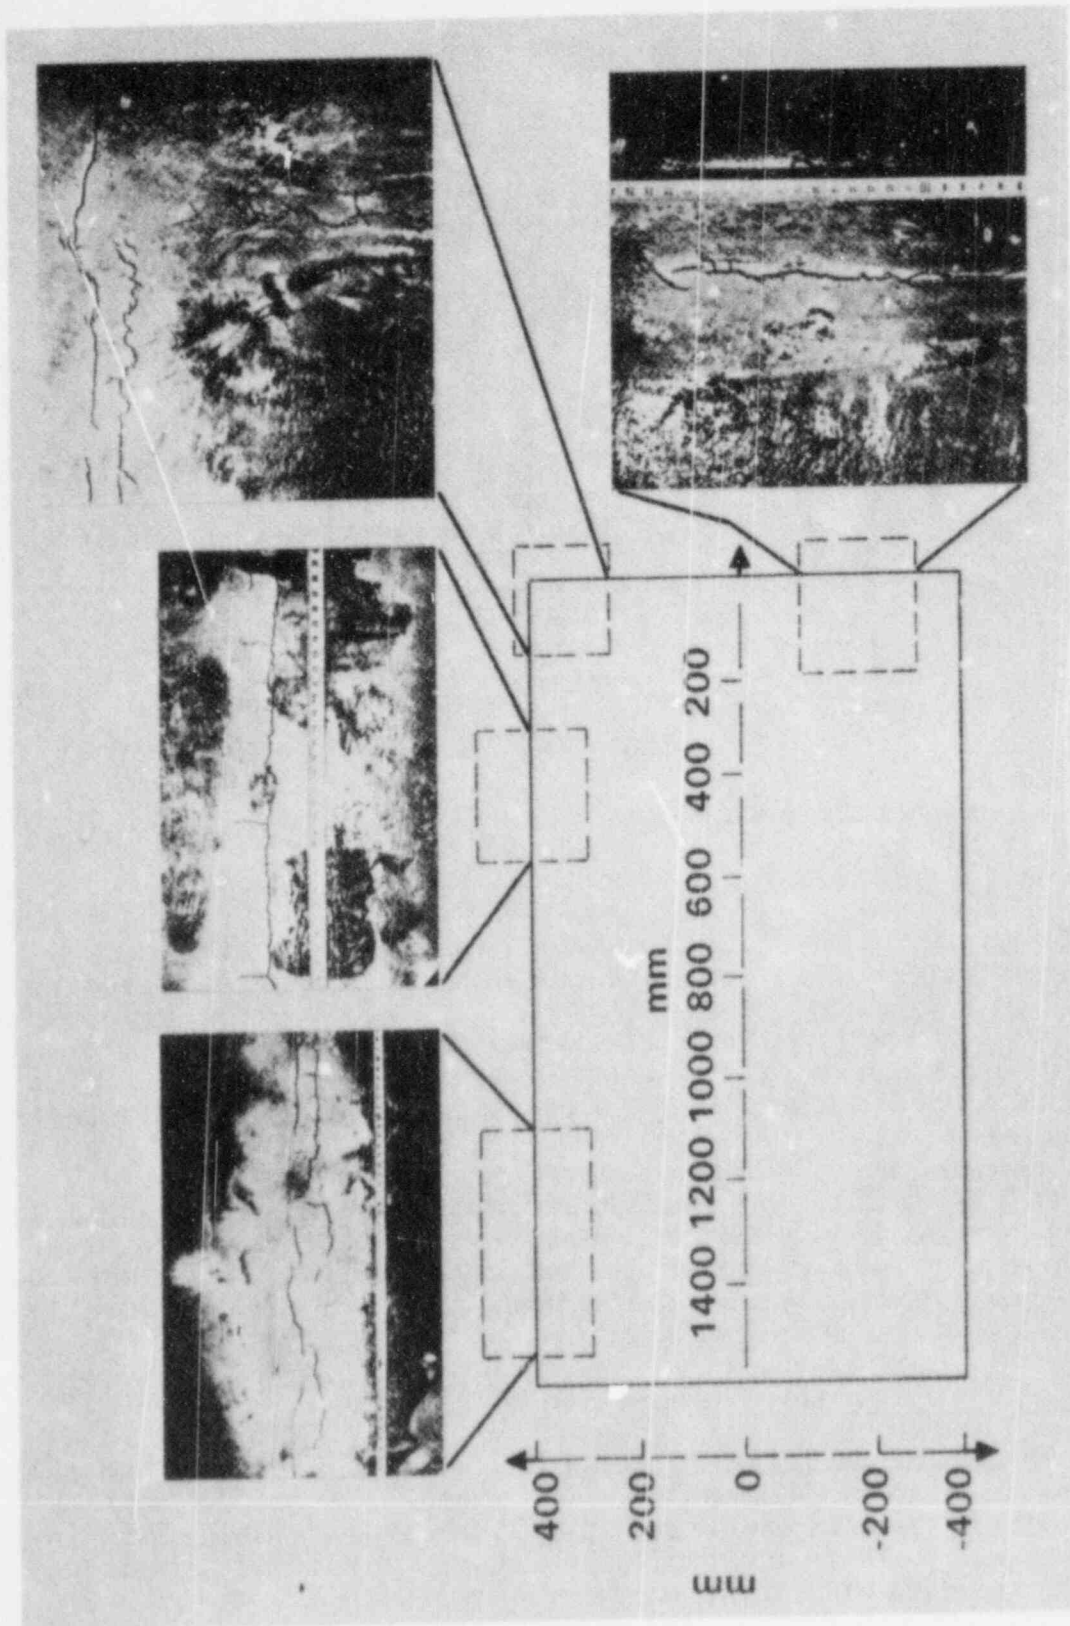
KS07R Insert Weld Crack, ZB-1 Vessel Test.
